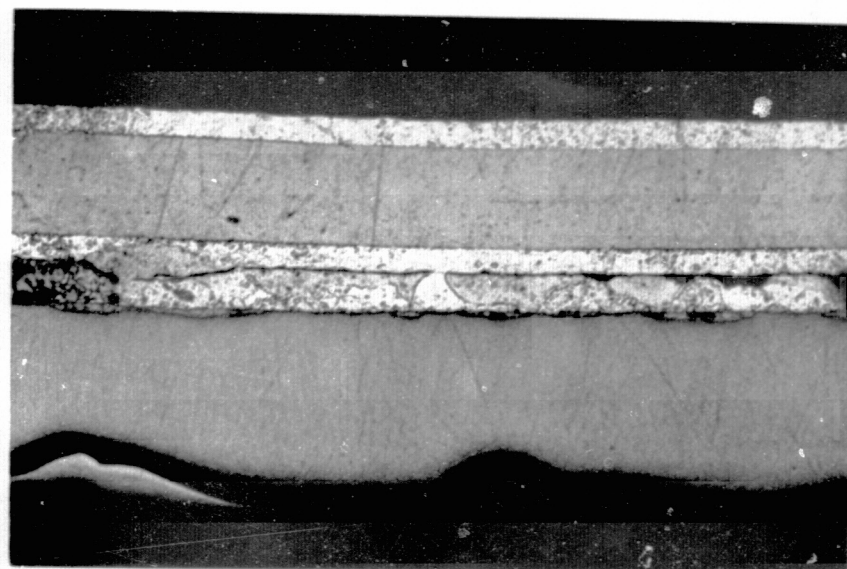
Joint No. 27, Cross Section of Cell Rear-Contact Weld
